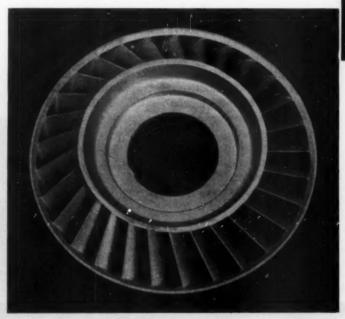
Cast aluminum turbine wheel for automotive torque converter showing smooth surface of the curved blades
